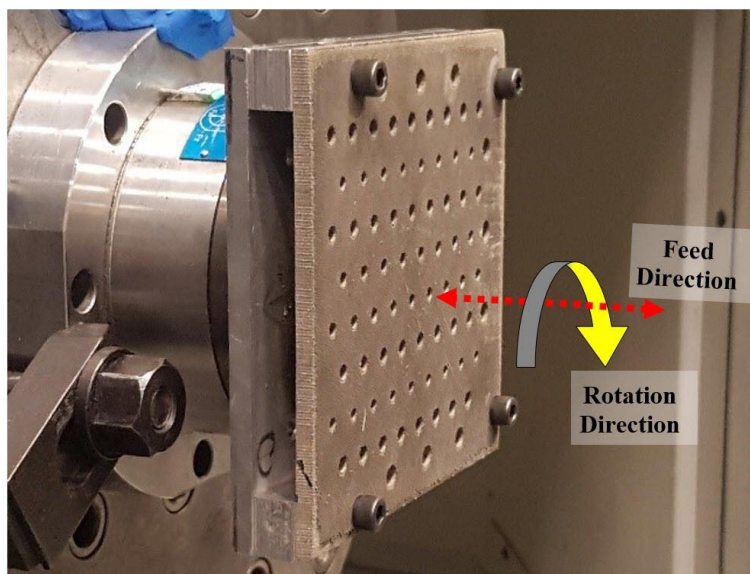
Experimental setup for the drilling process of IN 625 plate manufactured by LPBF technique
